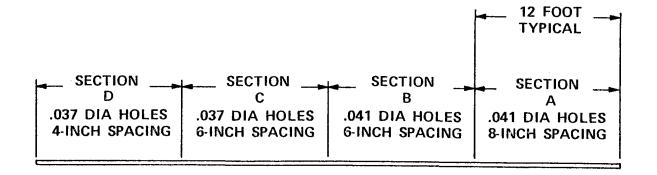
SPRAY TUBE HOLE PATTERN
